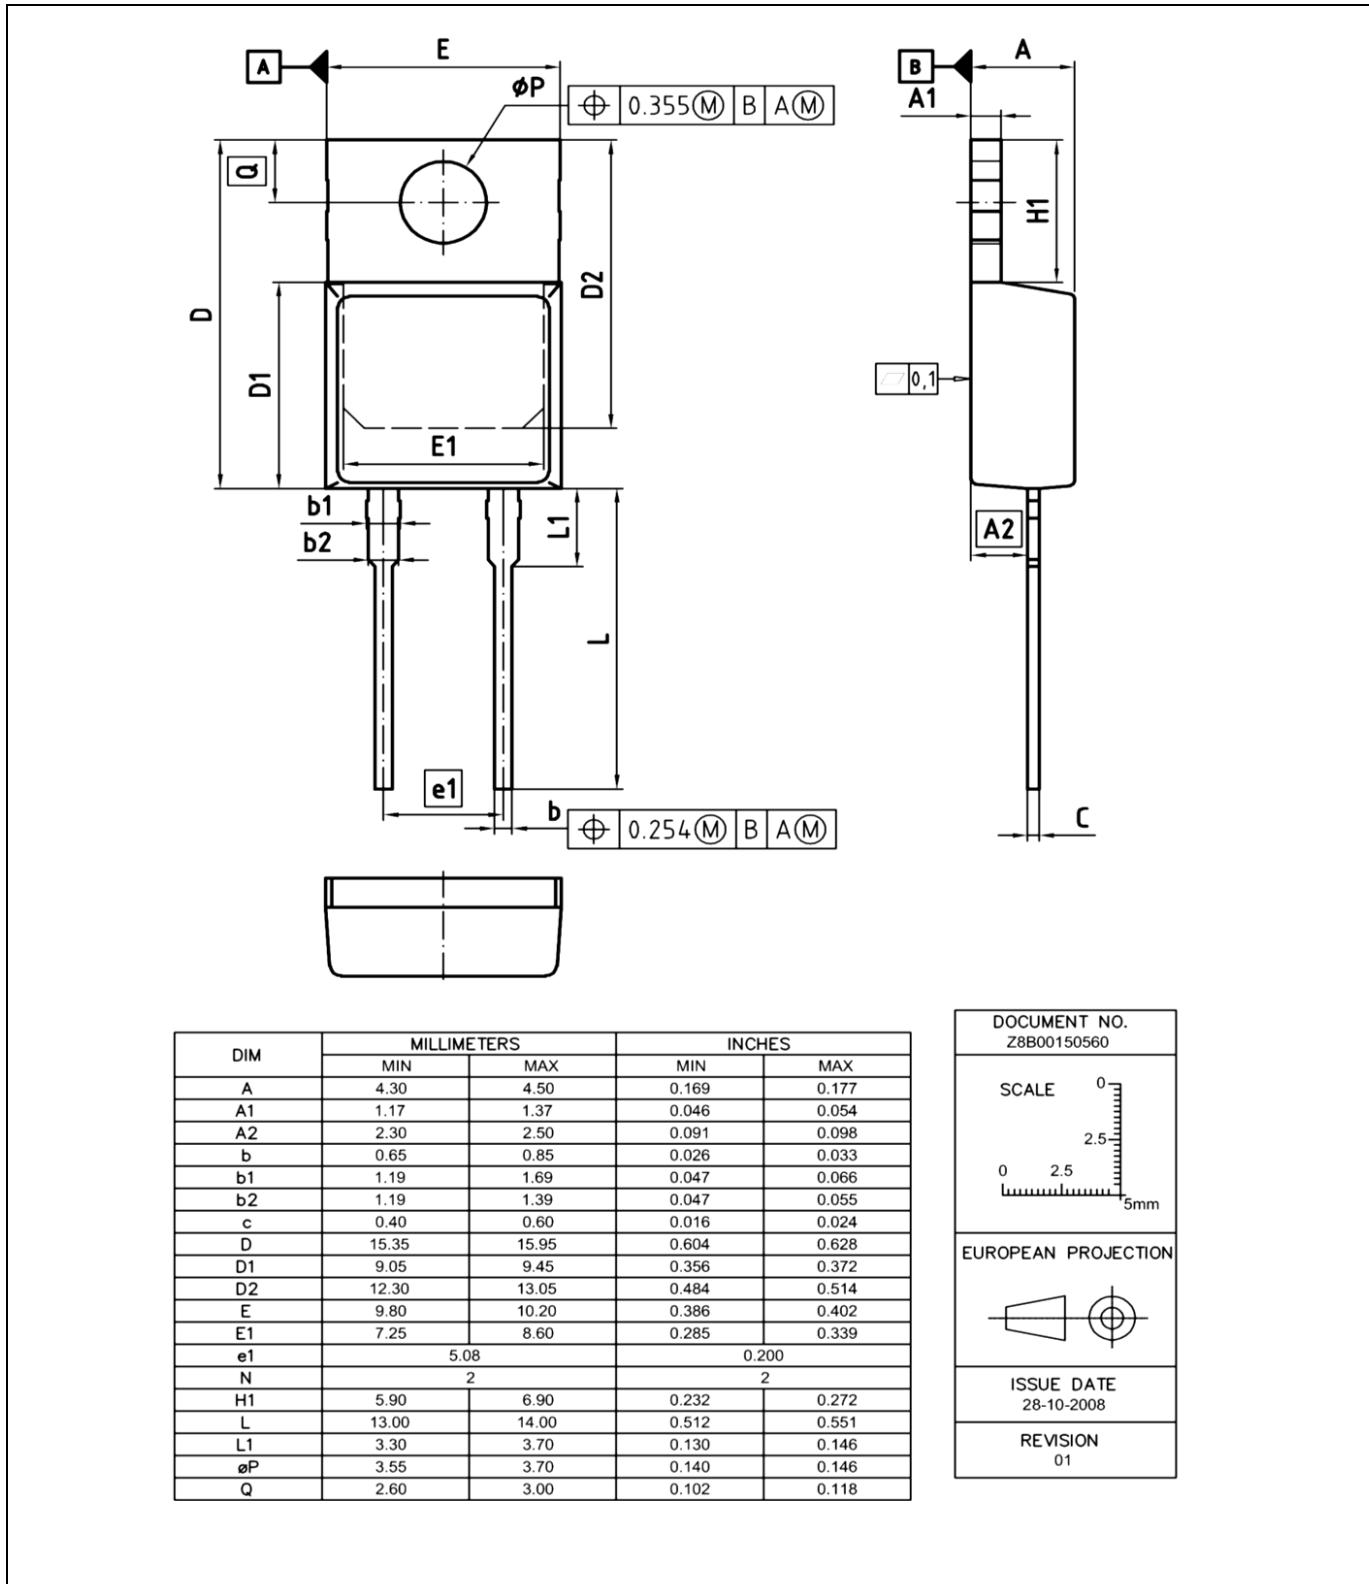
Outlines of the package PG-T0220-2, dimensions in mm/inches
